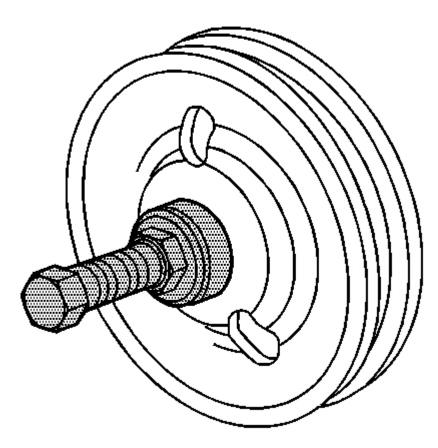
View Of Power Steering Pump Pulley Installer Courtesy of GENERAL MOTORS CORP.
